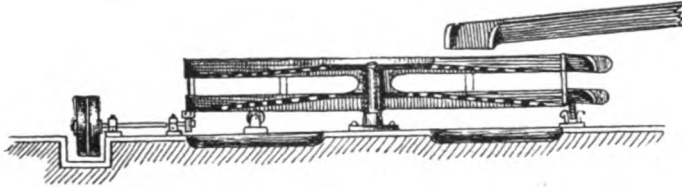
Friedrich's Screening Apparatus. Elevation.
